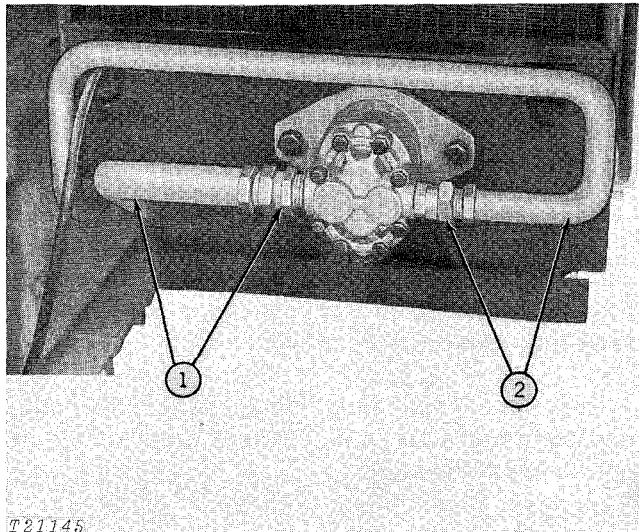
Mechanical Bulldozer with Hydraulic Tilt
